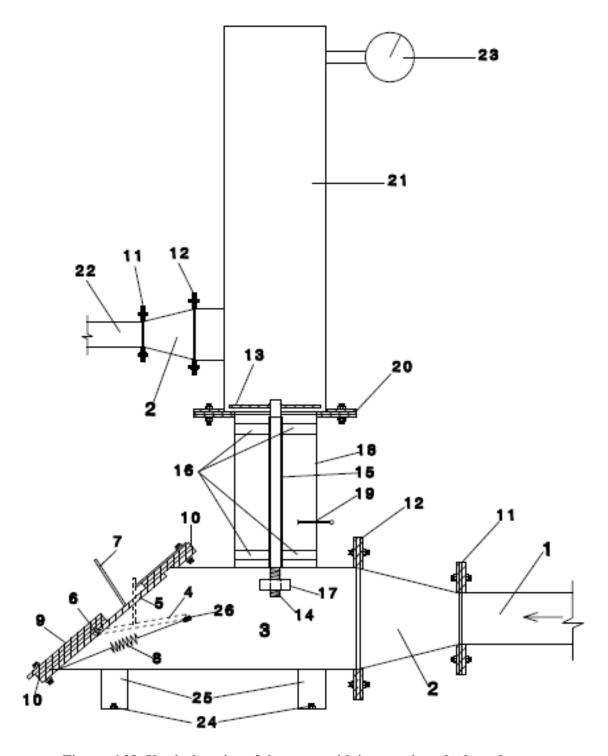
Vertical section of the pump with its generic and adopted parts
